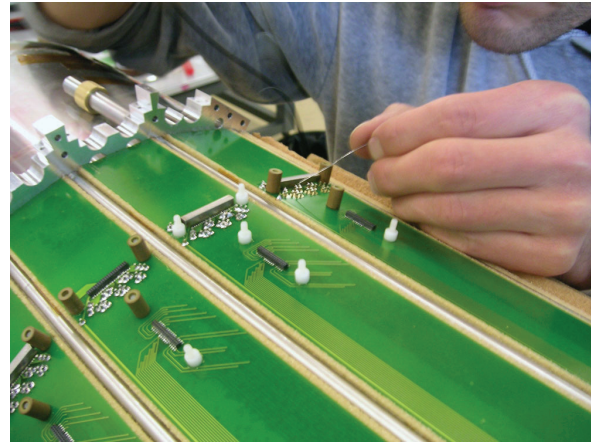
Soldering of the copper plated aluminum power wires to the Supply Tube printed circuit boards.
